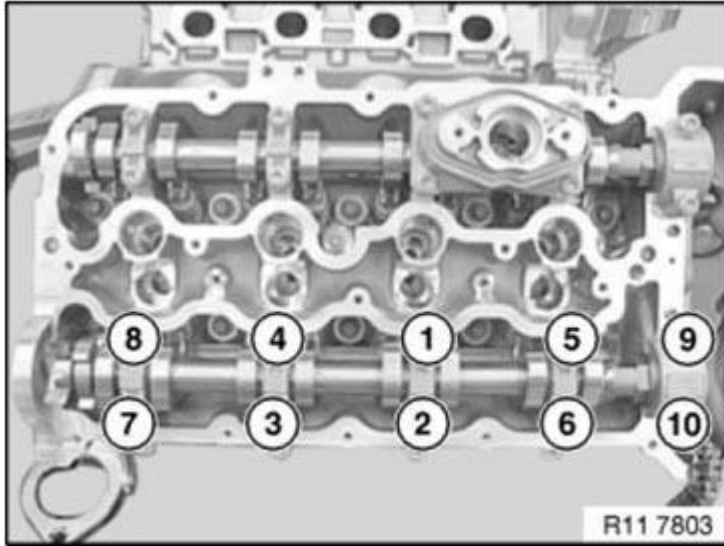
Identifying Camshaft Bearings Bolts Releasing Sequence
